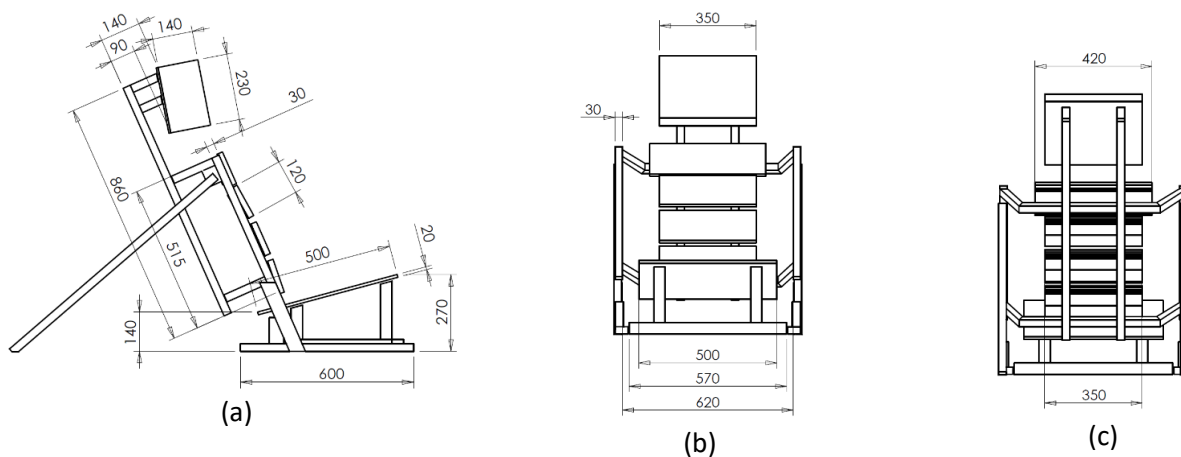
Schematic drawing of the Laboratory Seat: (a) side-view to the right, (b) front view, and (c) back view.
